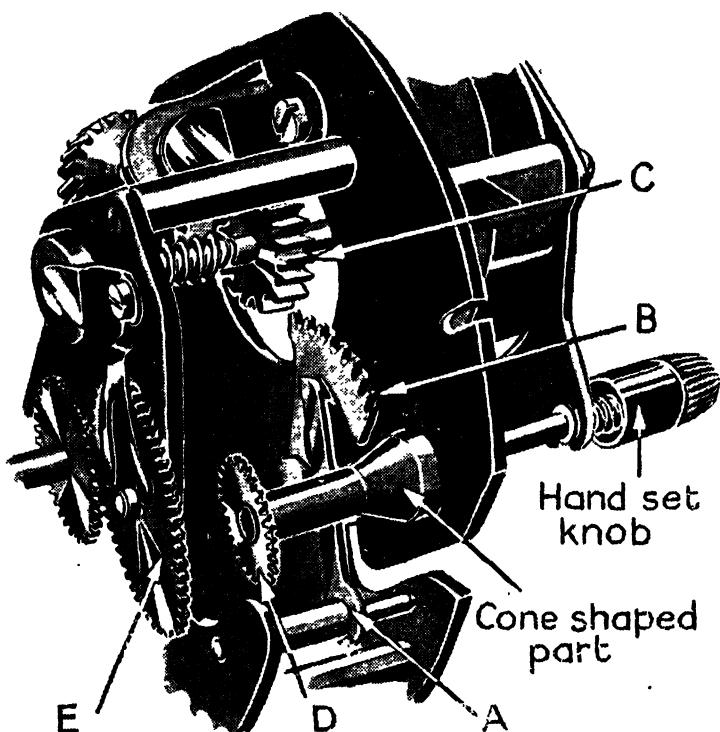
The fibre wheel A gears with the worm on rotor spindle. It operates other wheels and by suitable gearing the hour hand revolves once in twelve hours and the minute hand once an hour
